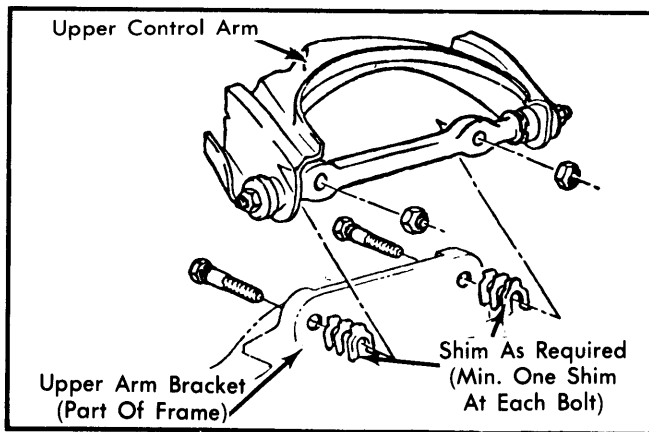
Pontiac Caster & Camber Adjusting Shims (Except Sunbird)
